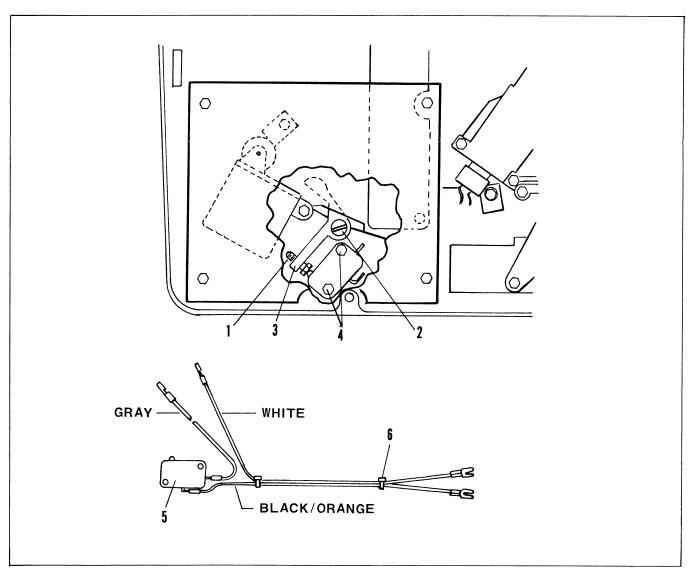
Top Deck Assembly - Homing Switch Components and Connector Wiring (850 Models Only)
